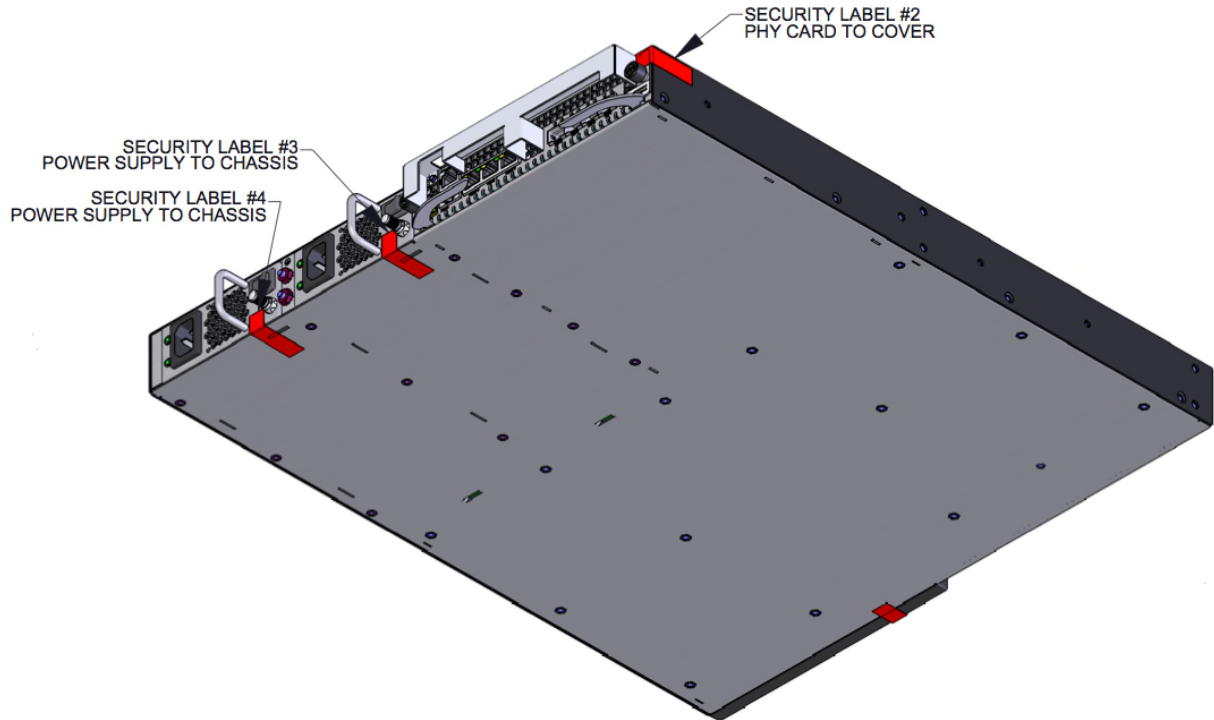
Acme Packet 3820 Tamper Evidence Label Placement Bottom/Rear
